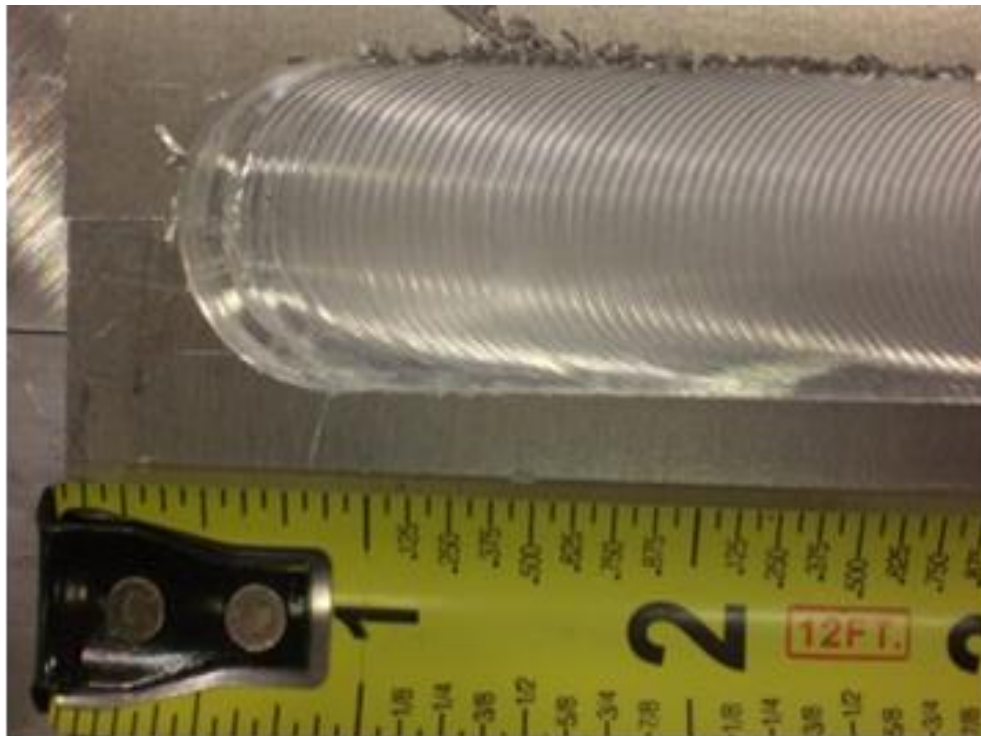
Start of the weld for a typical SR-FSW butt joint
